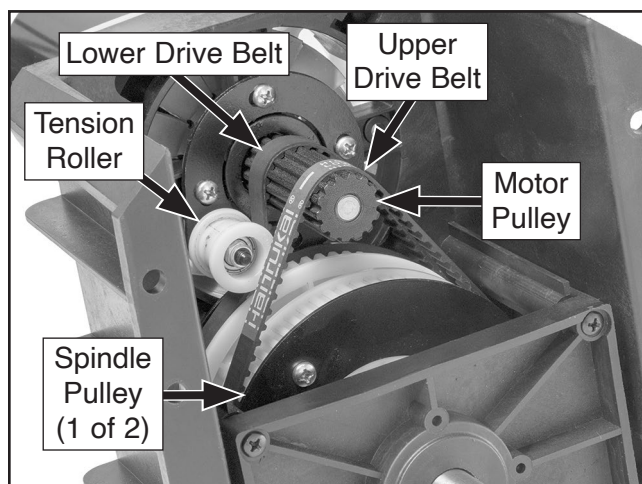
Drive belts positioned correctly around pulleys and tension roller.
